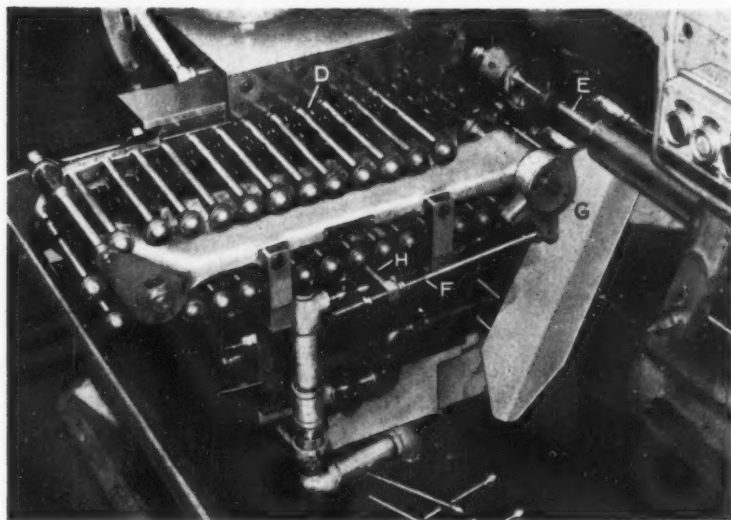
Close-up View of the $1\frac{1}{2}$ -in. Conomatic Machine, Showing the Loading Conveyor which is Mounted on a Special Cross-slide at the Sixth Spindle Position
